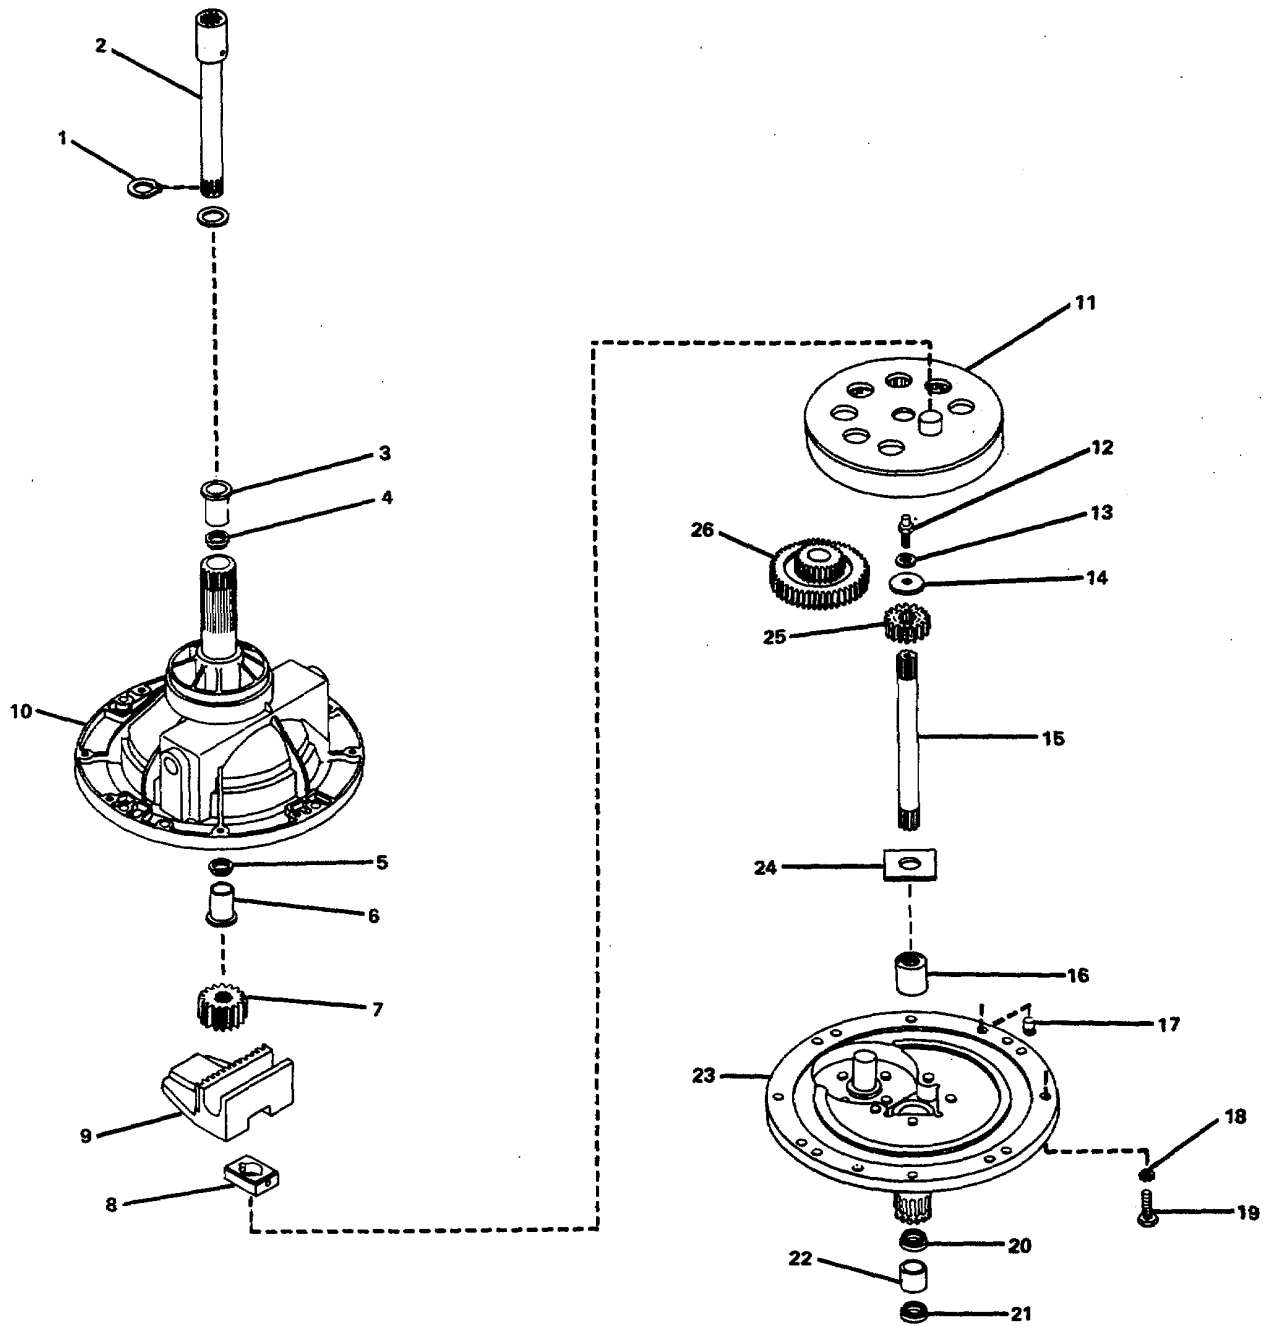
Washer Machine Mechanical Transmission.
